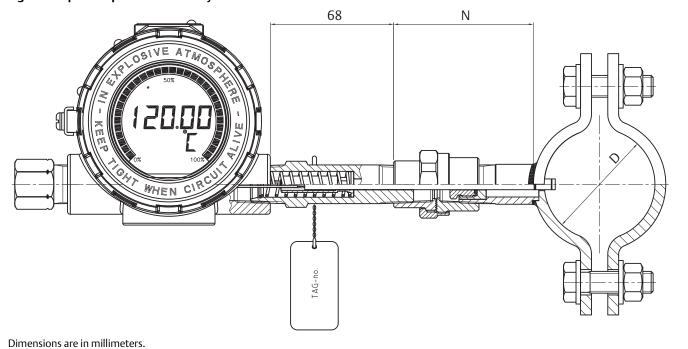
Pipe Clamp Sensor Assembly with Rosemount Connection Head
